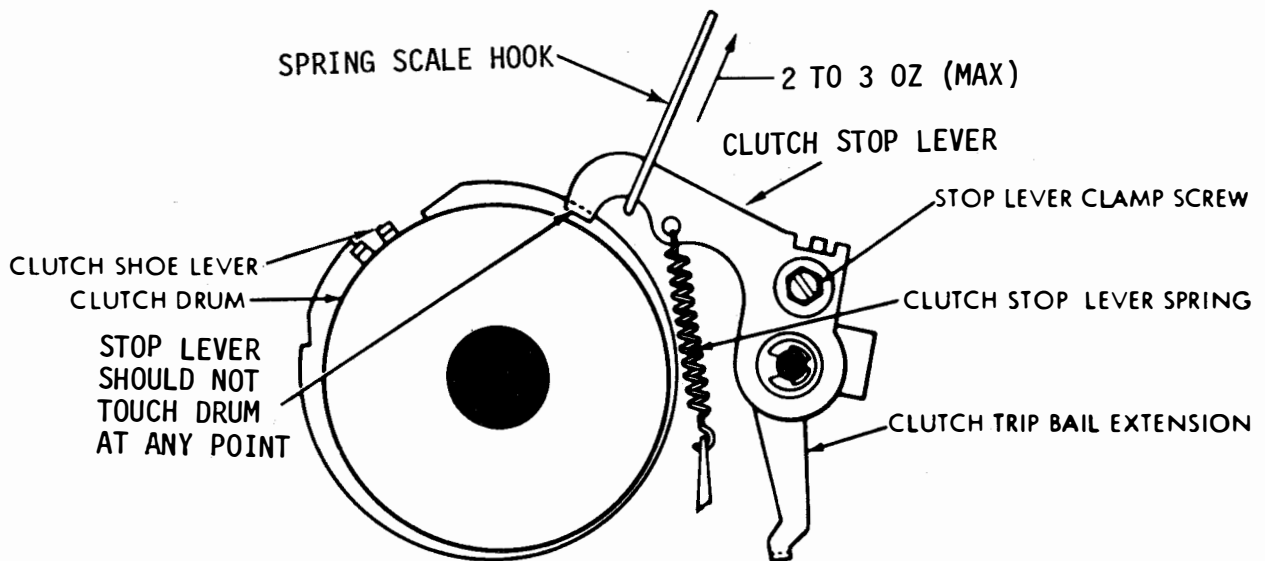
Clutch Stop Lever and Stop Lever Spring
